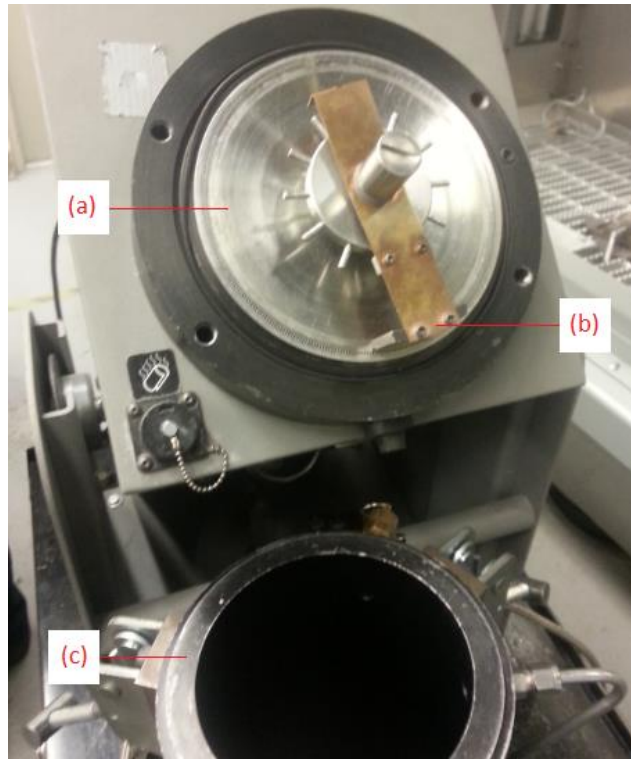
Disassembly of Thermach powder feeder, a) rotary wheel, b) powder hammer, c) powder canister
